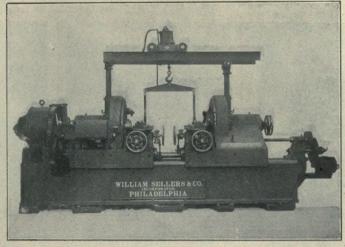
William Sellers & Co. 42-in. Car Wheel Lathe.
